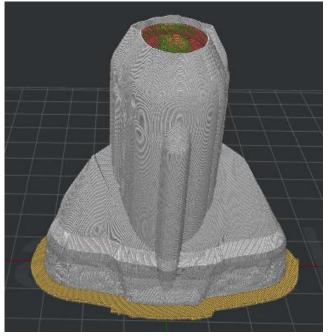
Set "Wipe Wall Type" to be "WaterFall".
